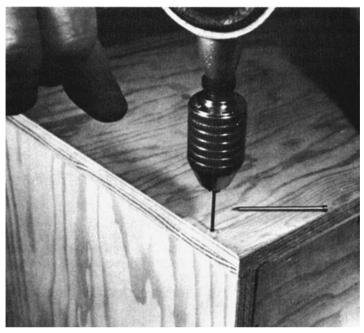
To prevent a nail from splitting wood, a pilot hole is sometimes drilled. Pilot-hole drilling is common when using
